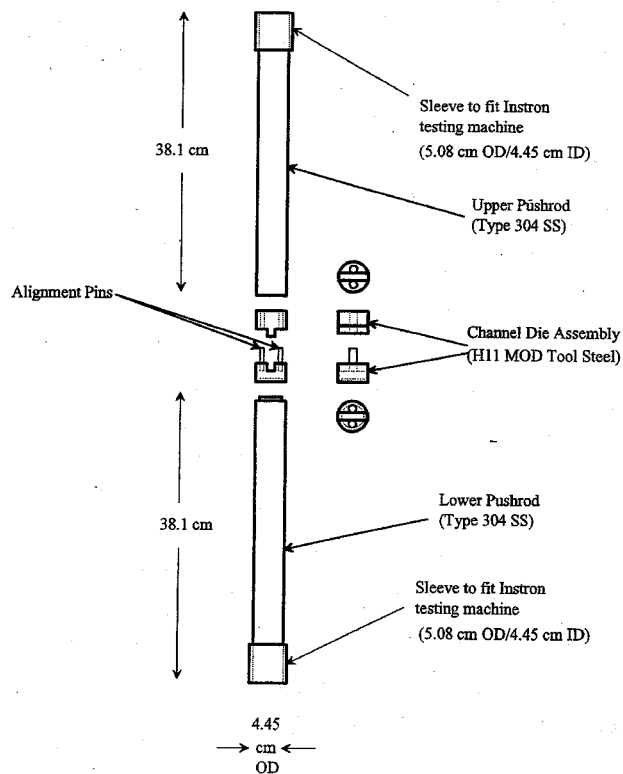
Schematic of the channel die compression set-up for the INSTRON testing machine. The channel die tool is seen in the middle. (Ref. 24)
